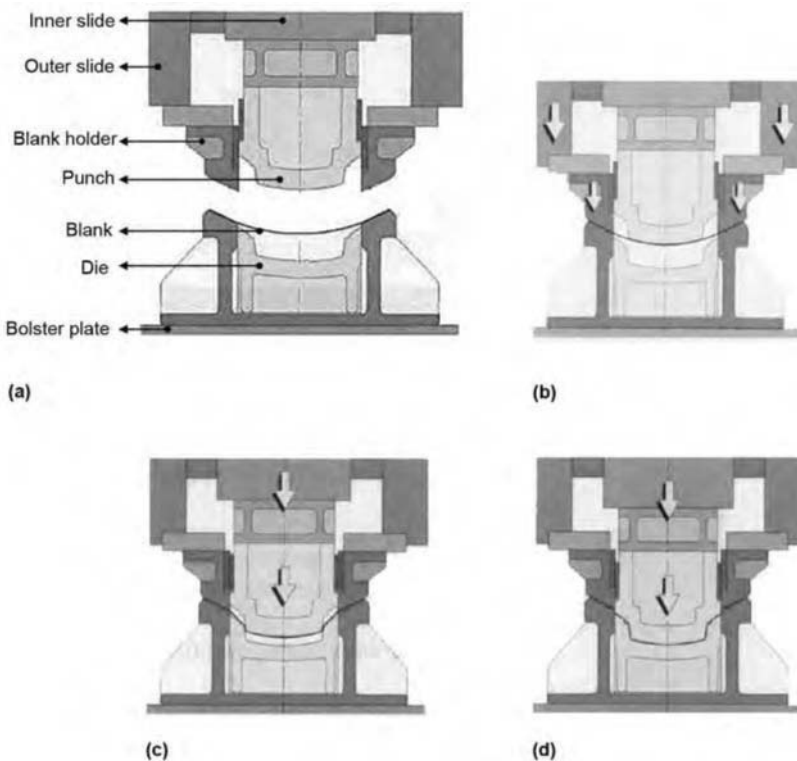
Schematic of double-action deep drawing die: (a), initial setup (b), closing the tool (c), forming the part, and (d) end of drawing. Source: Ref 13.2
